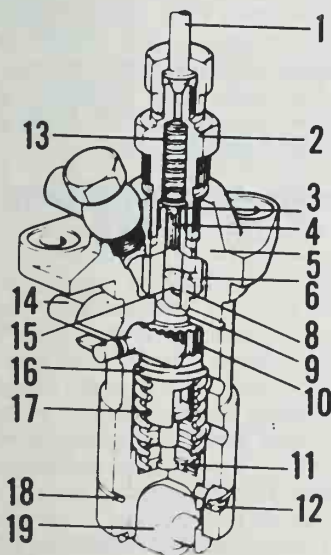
Cross sectional view of Bryce or Kiki injection pump.
